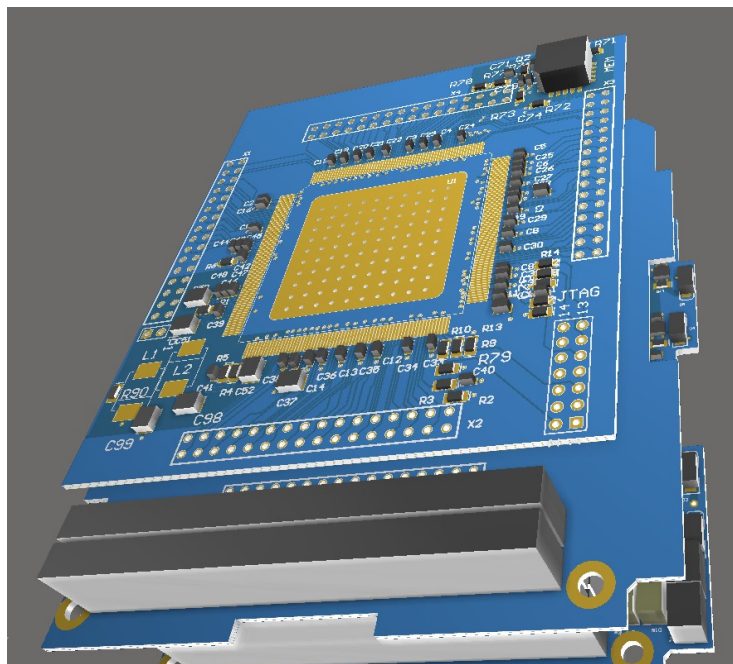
CAD view of assembly of daughter board with DPC, main OBC board, and EPS board (from top to bottom).
